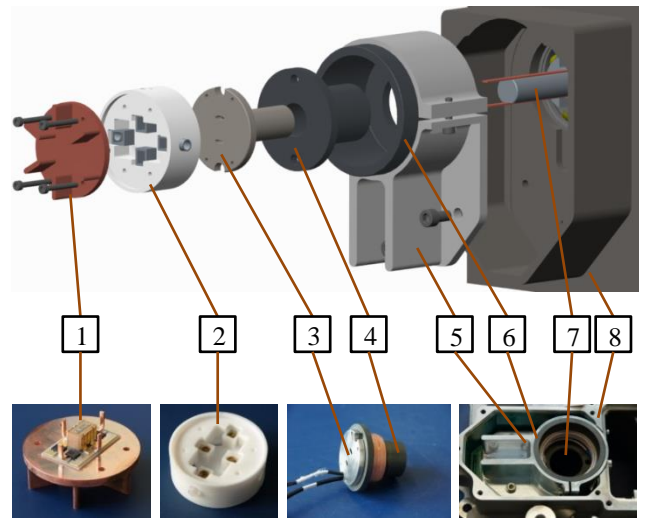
Exploded drawing of the IETS with the components for the integration in the EESM
